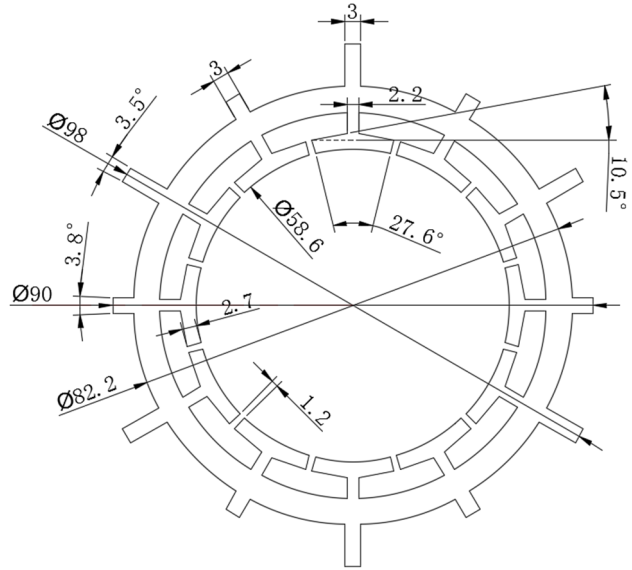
12-slot stator dimensions for 12/13 TW-FRPM machine.
